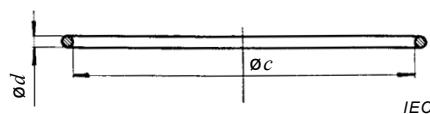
Flange type A: 60154 IEC-AR 58-70 gasket
